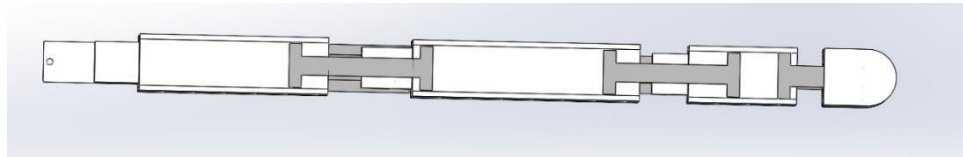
CAD Model of Independent Finger Mechanism (Top View)
